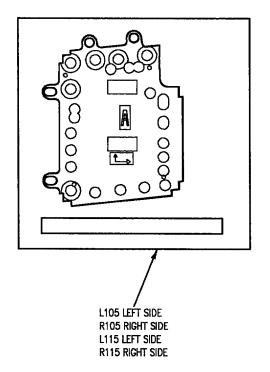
Installation of Plate Set for Drilling Door 78 (Sheet 3)
